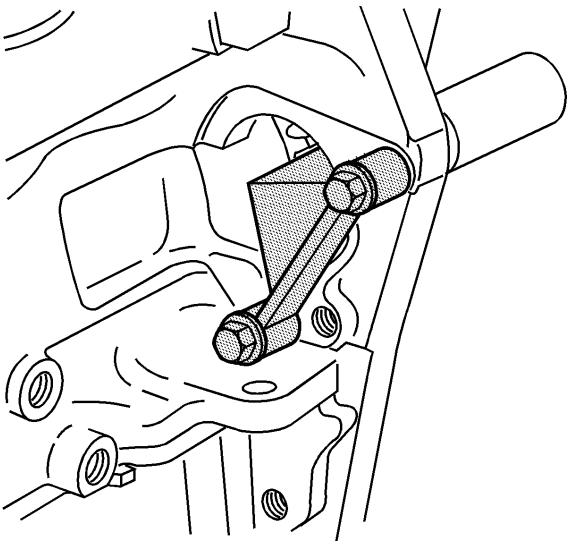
Identifying Special Tool - EN 46106 Courtesy of GENERAL MOTORS COMPANY
